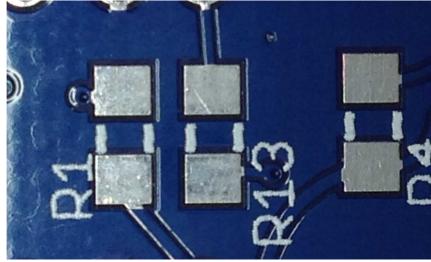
SMD resistor pads and silk screen on PCB (showing R1)
